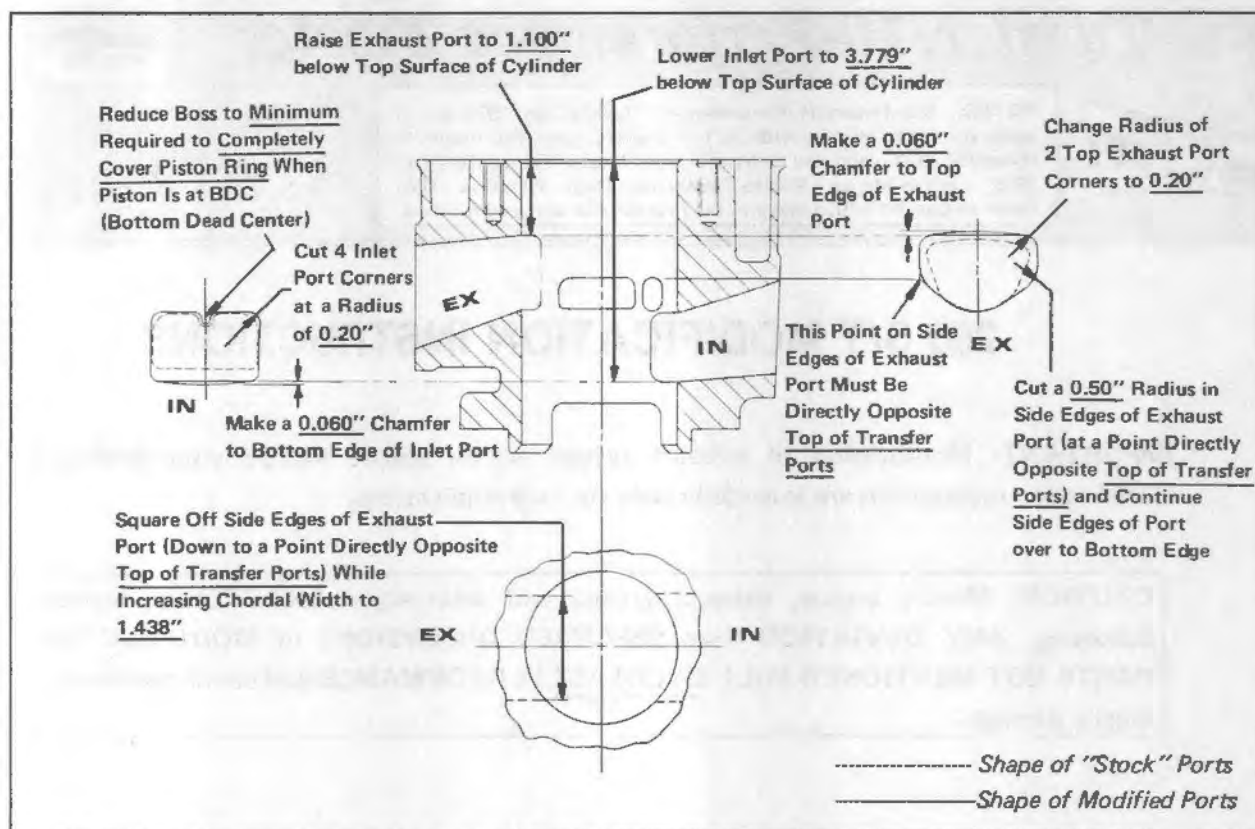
250 S/T "Modified-Stock" Cylinder Dimensions
